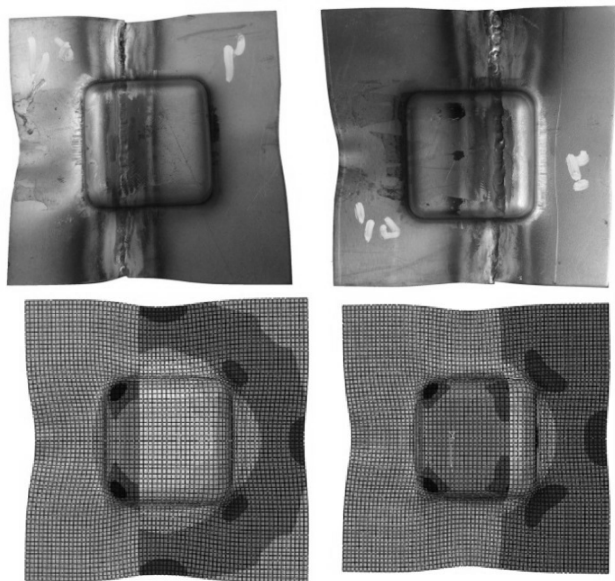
Simulation and experimental results of weld-line movement for the two piece blank holder
